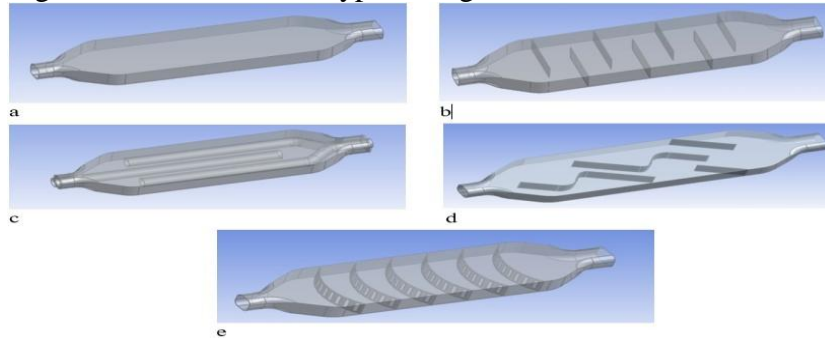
Five internal structures Geometry Models:- (a) Empty cavity, (b) Serial plate, (c) pipe structure, (d) Wavy-fin plate, (e) Obstruction
